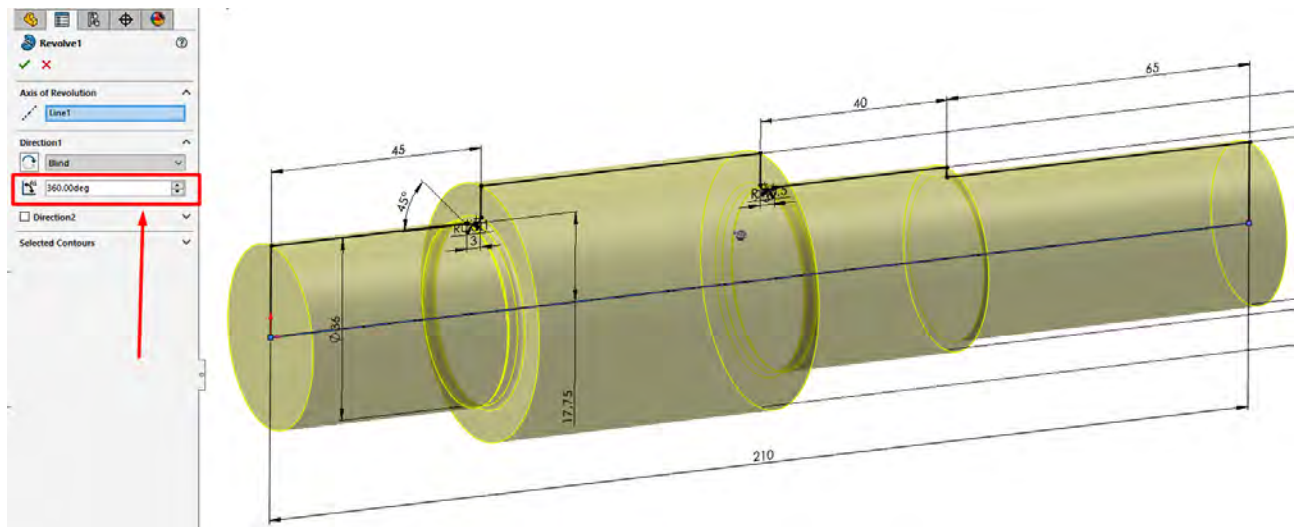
Using Revolved Boss/Base to obtain a shaft model
